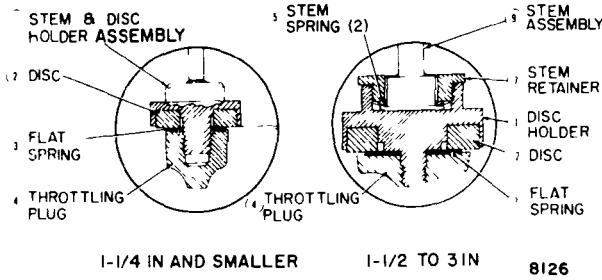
Disc Holder Assemblies Used in V5011A Screwed Type Body
